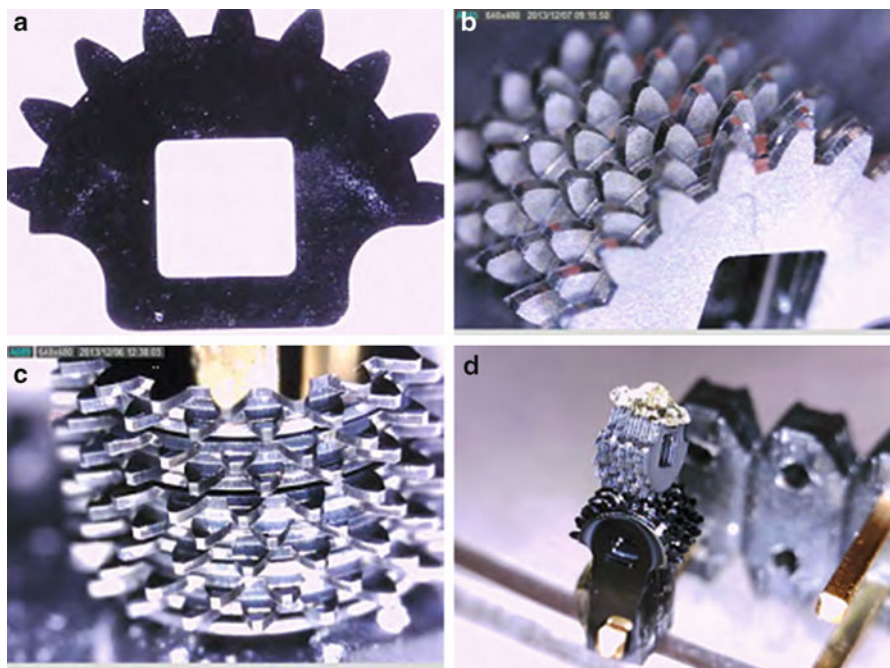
Photographs of a prototype crossed-cylinder wrist fabricated using 3D printing [(a) – two geared half cylinders shown separately, (b–d) – two geared half cylinders in different positions]
